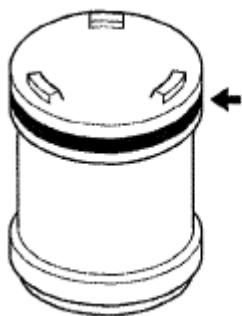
Identifying O-Ring On B-3 Accumulator Piston
